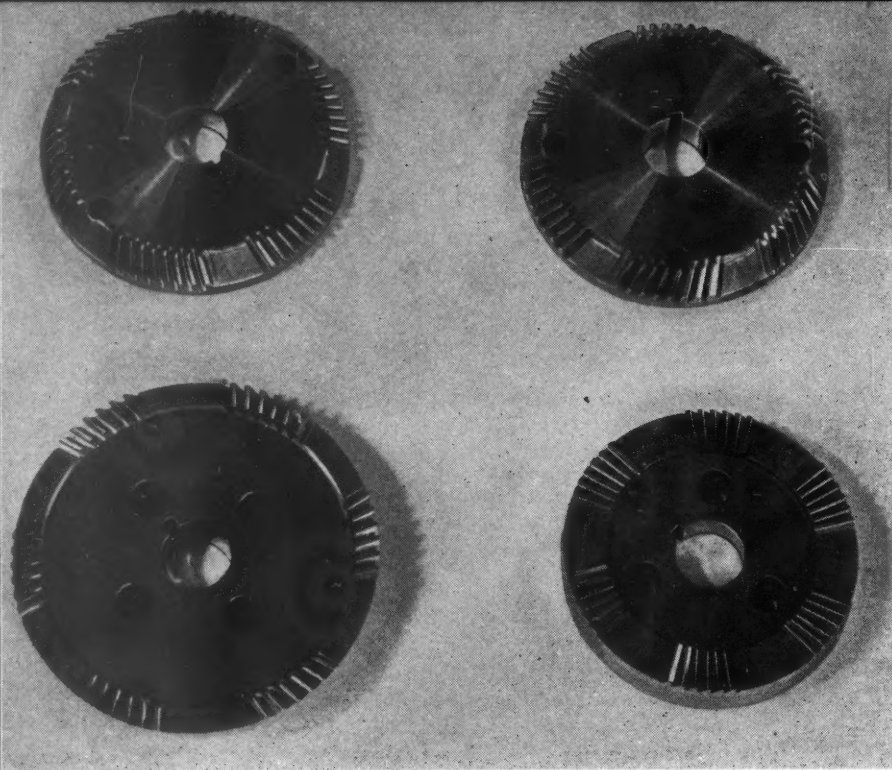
Group of rotary broaches used to machine straight surfaces on sheet-metal stampings within close tolerances and with smooth surface finishes
